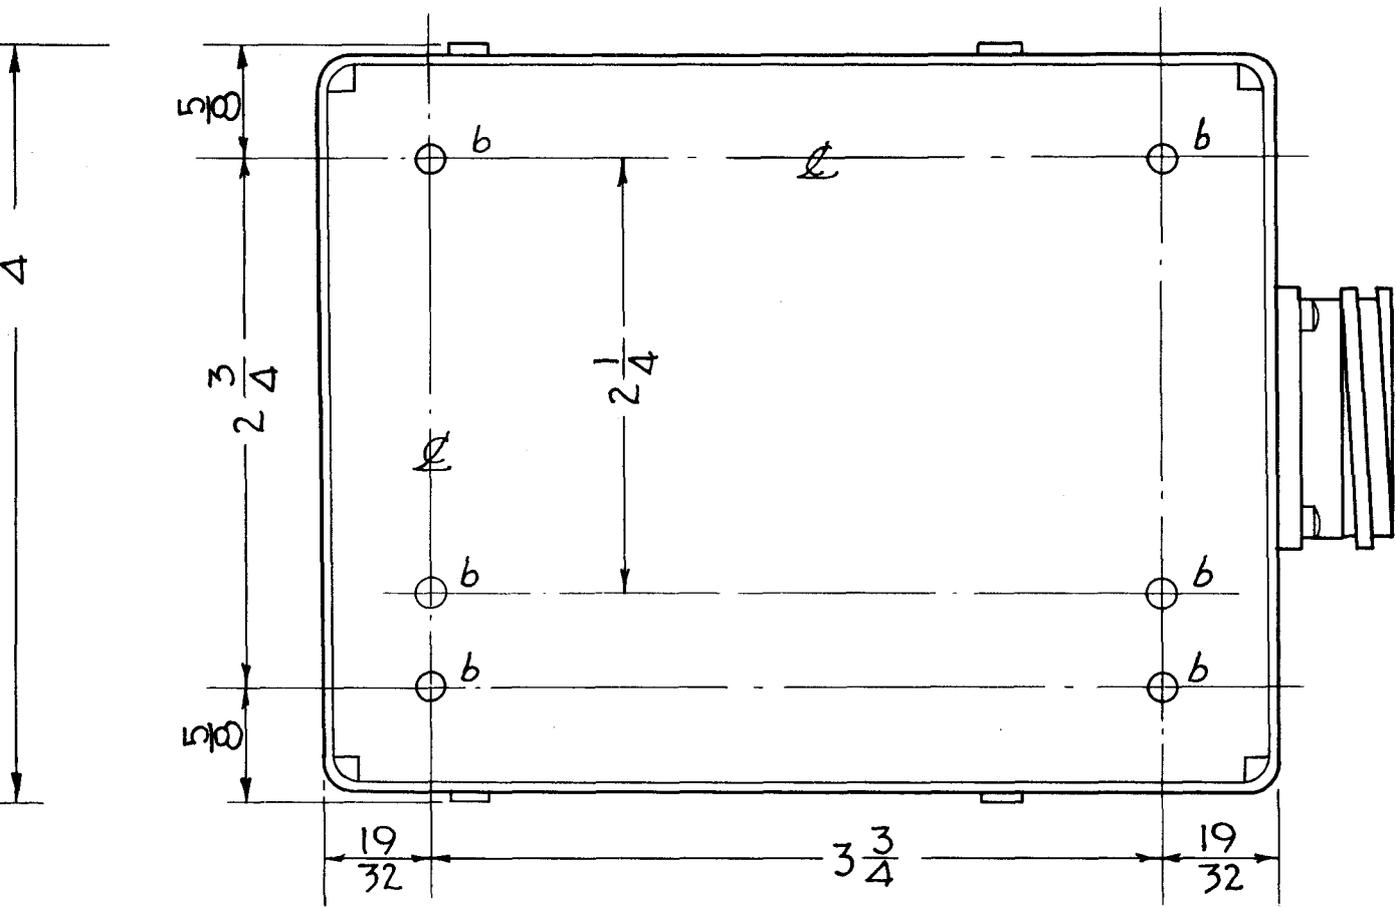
OUTLINE & MOUNTING DIMENSIONS TYPE TA-12B TRANSMITTER
